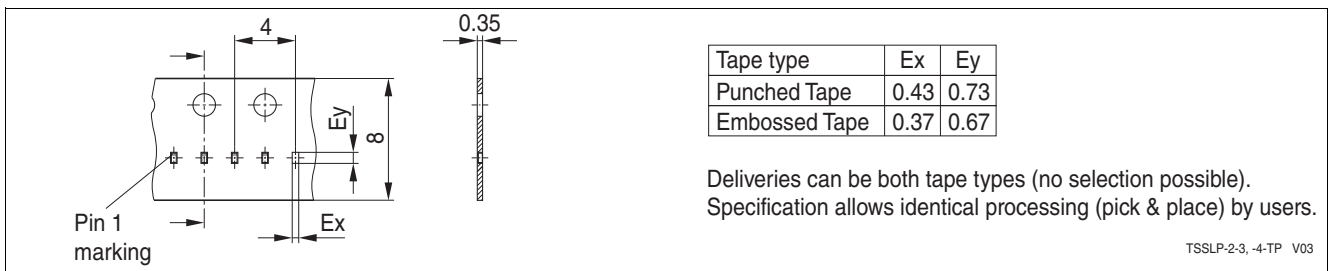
TSSLP-2-4 Packing (dimension in mm)
